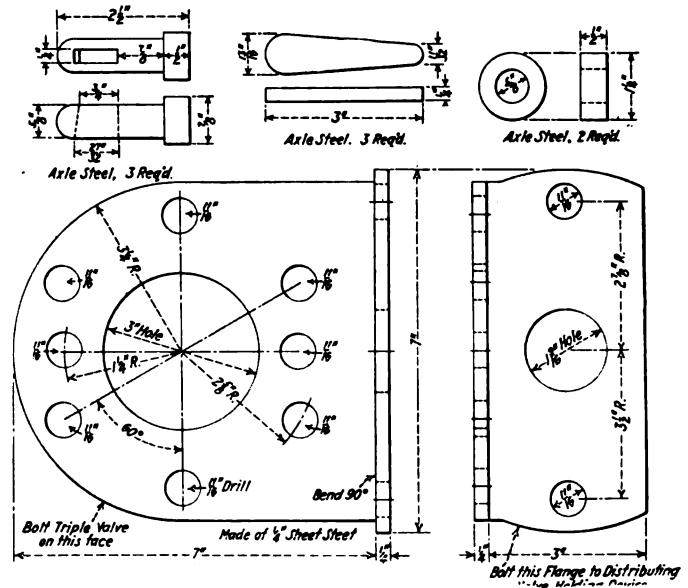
Attachment used on the distributing valve device for holding quick action triple valves when making repairs
